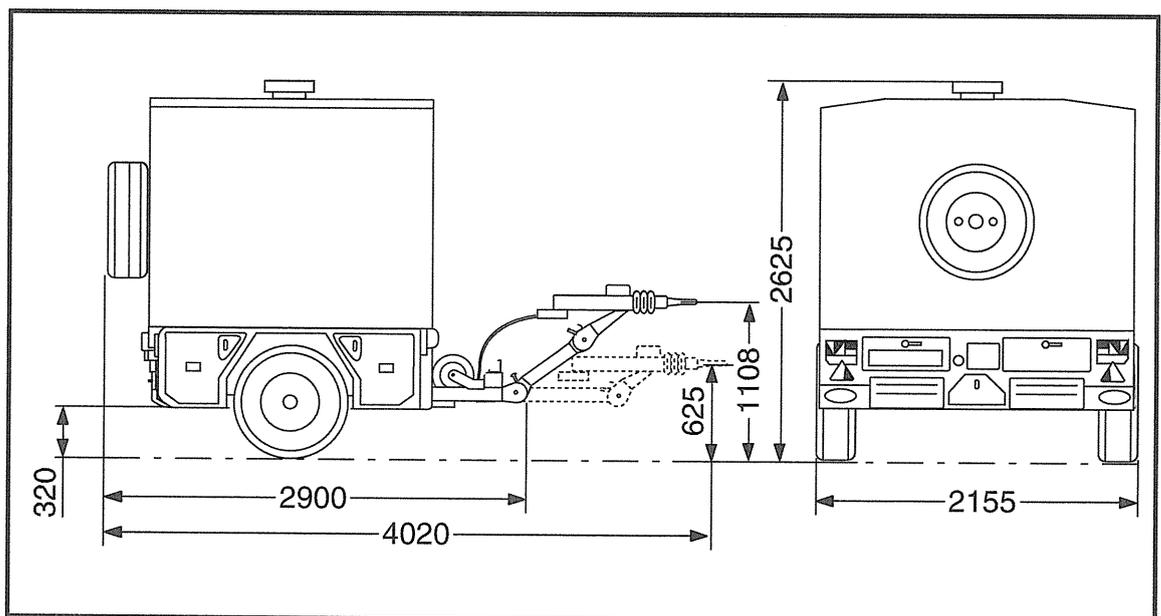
Dimensions of the trailer (variant 2), ready to move
